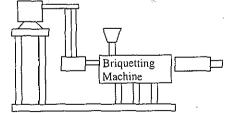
Block diagram of a heated die screw press type briquetting Machine
